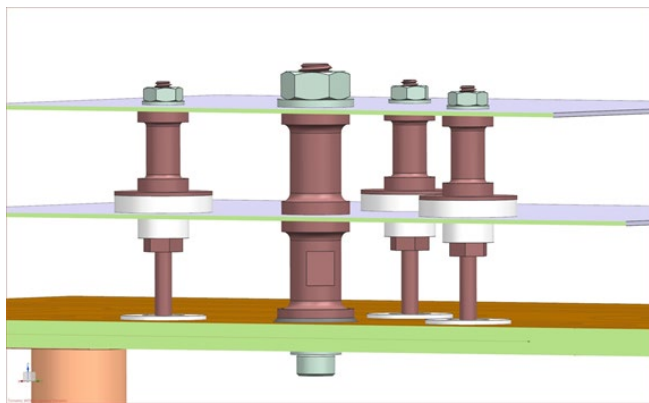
, Early concept of the patch stack-up where the various parts were screwed together with nuts into threaded fittings.
